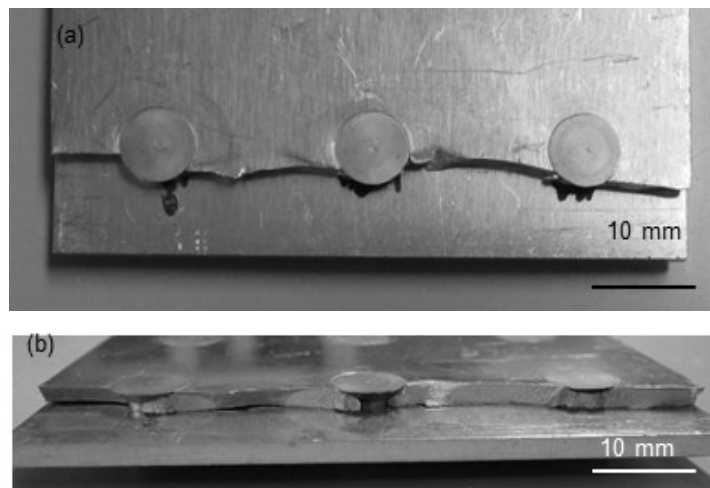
Riveted joint fractured on the manufacturing side ( $\Delta\sigma = 69.8$  MPa, failed at 727k cycles) (a) top view and (b) fracture surface
